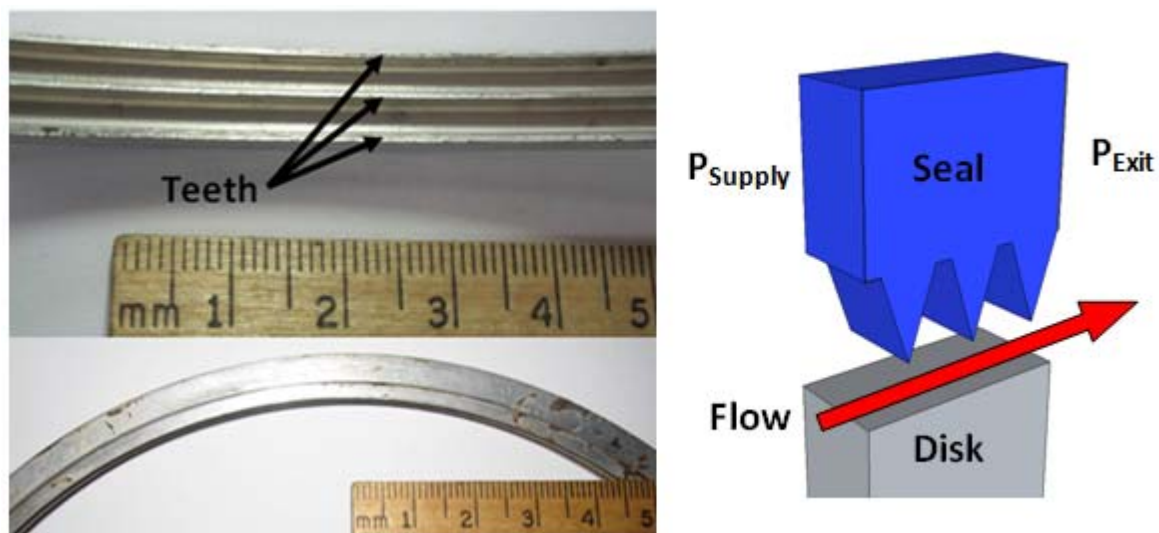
Inner side view of a three tooth labyrinth seal and schematic view of thru flow
